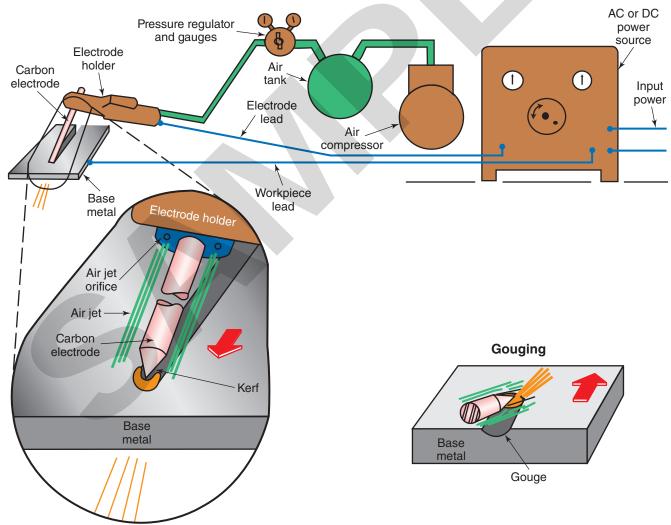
shows a typical station for air carbon arc cutting and gouging. The electrical supply may be either a direct current (DC) or an alternating current (AC). An electrode lead (flexible cable) connects the electrode holder to the welding machine, and a *workpiece lead* connects the base metal to the machine.
